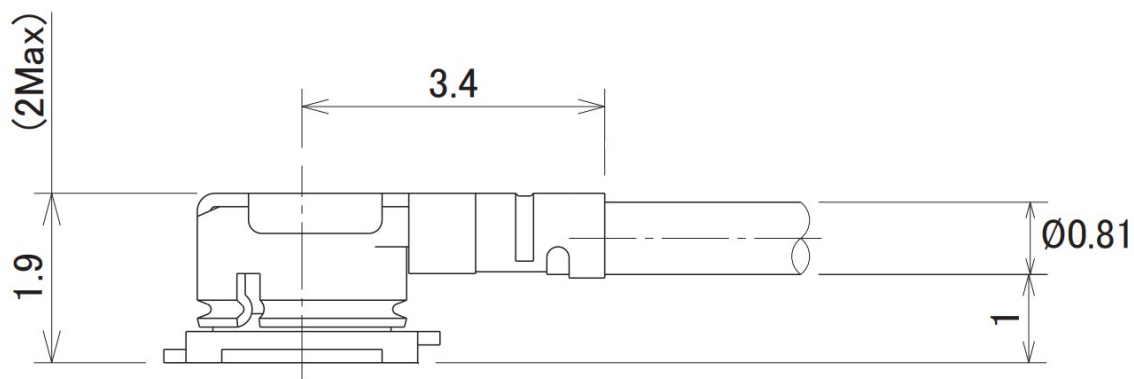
Space Factor of Mated Connectors ($\varnothing$ 0.81 mm Coaxial Cables) (Unit: mm)
